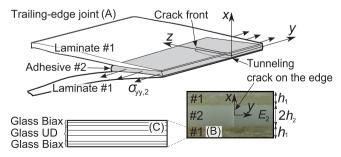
(A) Trailing-edge joint with a tunneling crack propagating across the adhesive layer in the z-direction. (B) Photo of a tunneling crack in a trailing-edge wind turbine blade joint. (C) Typical layers in a glass fiber laminate used in a wind turbine blade joint.
